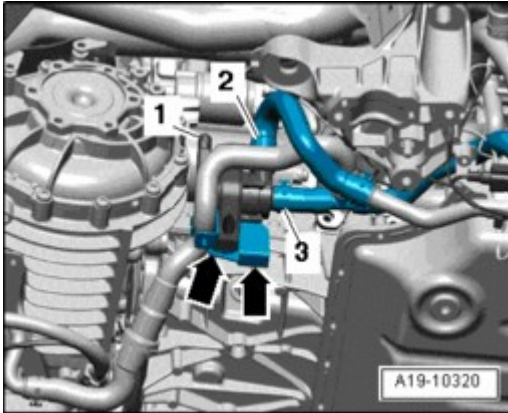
Identifying Coolant Hoses, Hose Clamps 3094, Electrical Connector & Electrical Connector
